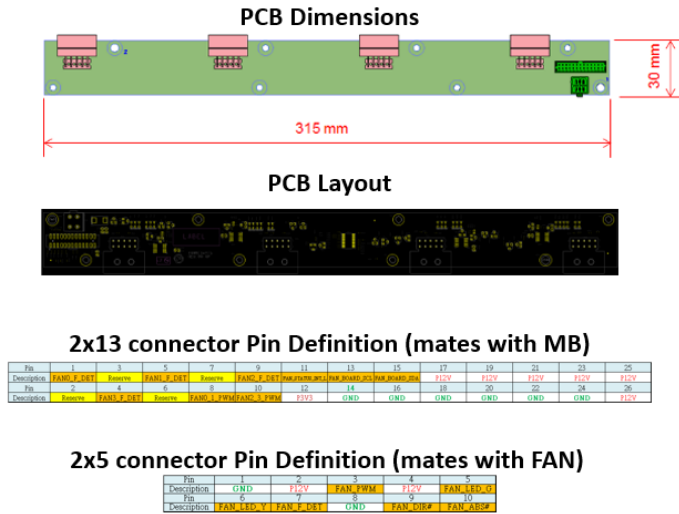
Fan Board Dimensions, Layout, Pin Definition
